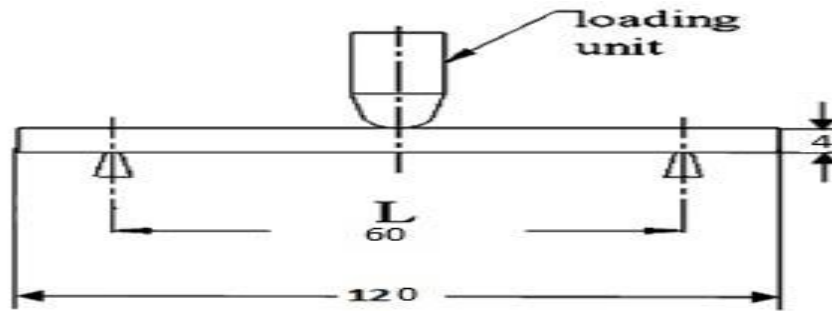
Flexural test specimen as per ASTM D790 standards. All Dimensions are in mm
